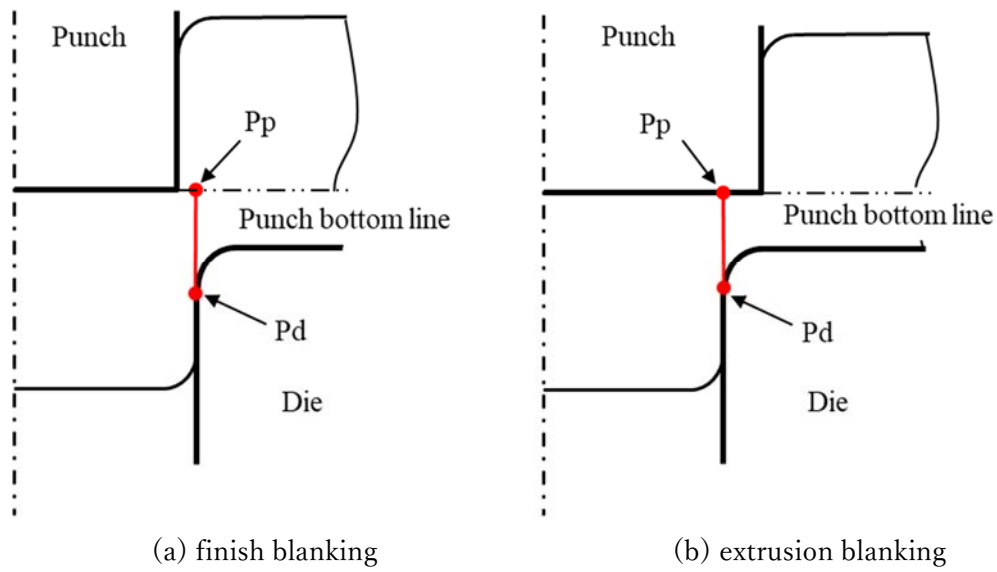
Measurement line on the inner wall of the die assuming machining progress.
